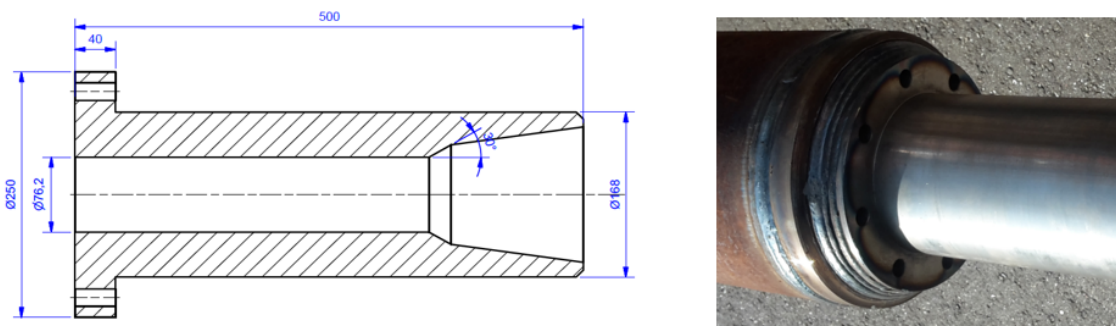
Cross-over design and actual piece showing the perforations which allowing the BHA to fill with mud
